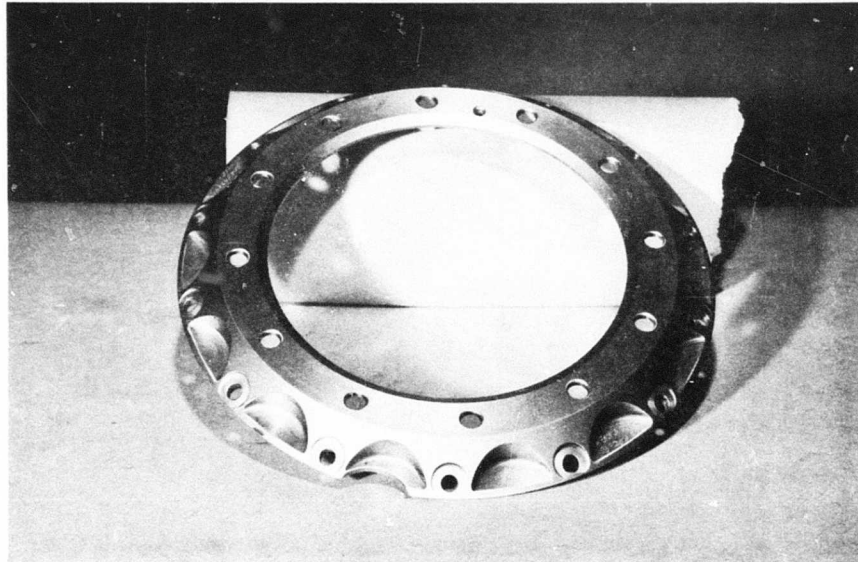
Front View of Gearbox Adapter Assembly Which Fits on Front of Gearbox Extension Case.
